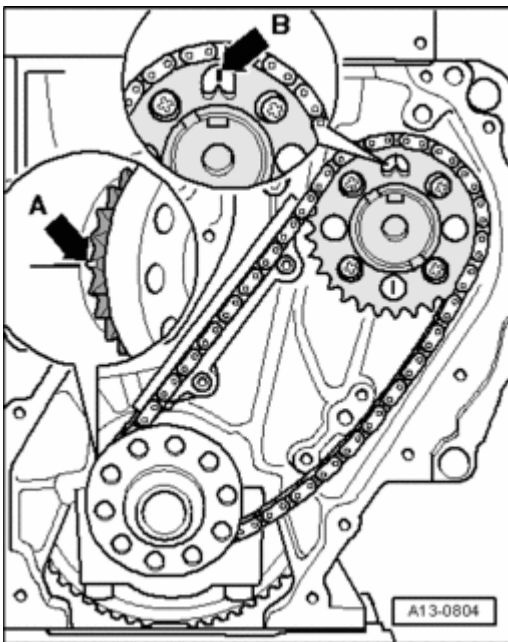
Installing Drive Chain Together With Large Sprocket Of Intermediate Shaft
